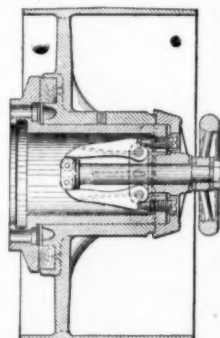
FRICTION CLUTCH FOR GAS ENGINES.
